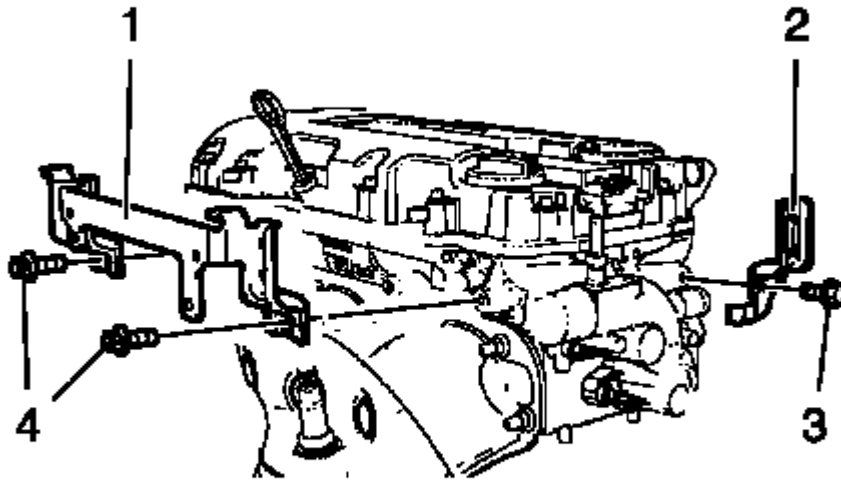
Sidewise Engine Lift Bracket And Bolt
